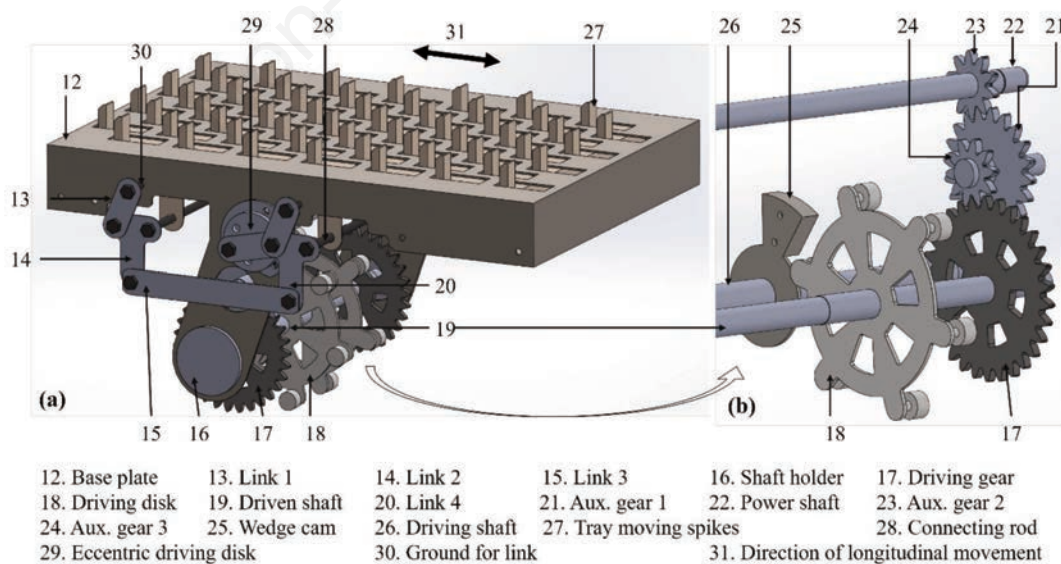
Detailed design and assembly of the component used for (a) longitudinal movement mechanisms of the seedling plug-tray cutting mechanism with (b) a closer view of its gear system.
